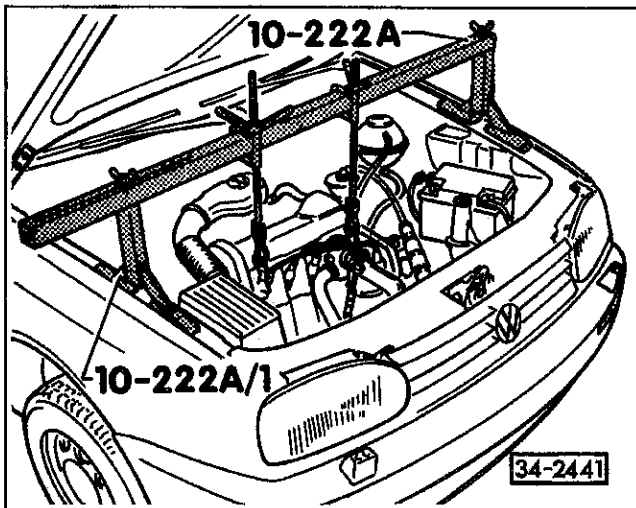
Engine/transmission assembly being supported from above. Volkswagen special tools shown.
